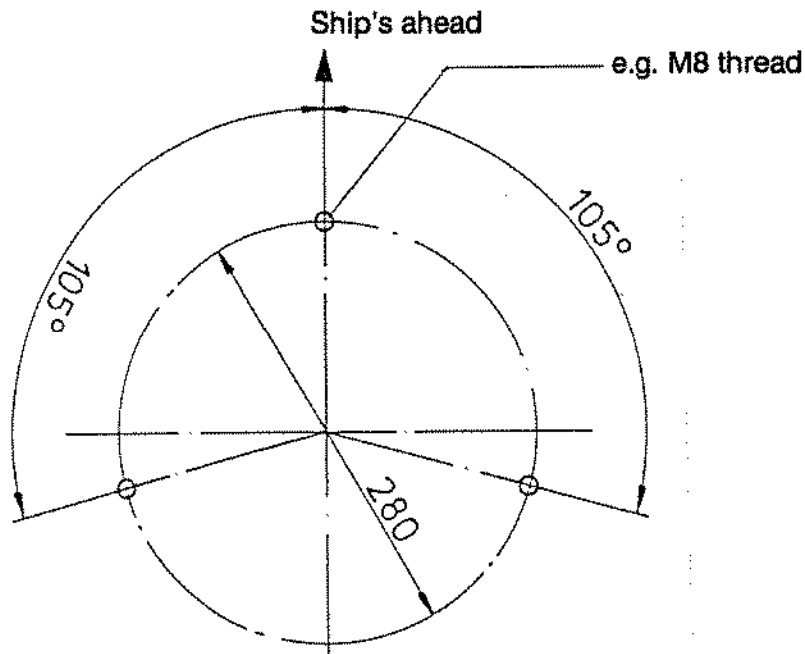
Marking the 3 Points for Fastening the Gyro Compass STANDARD 14 (Drilling Scheme)
